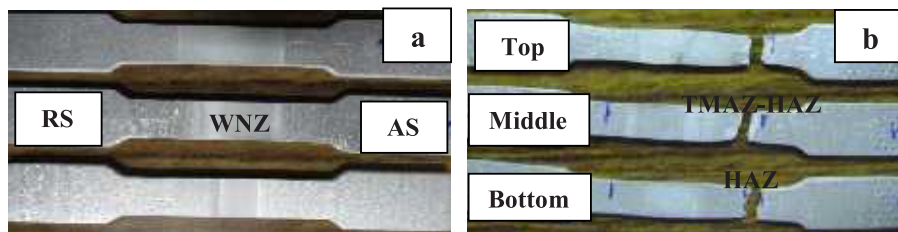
Transverse tensile specimen of FSW joints (a) before, and (b) after tensile test
